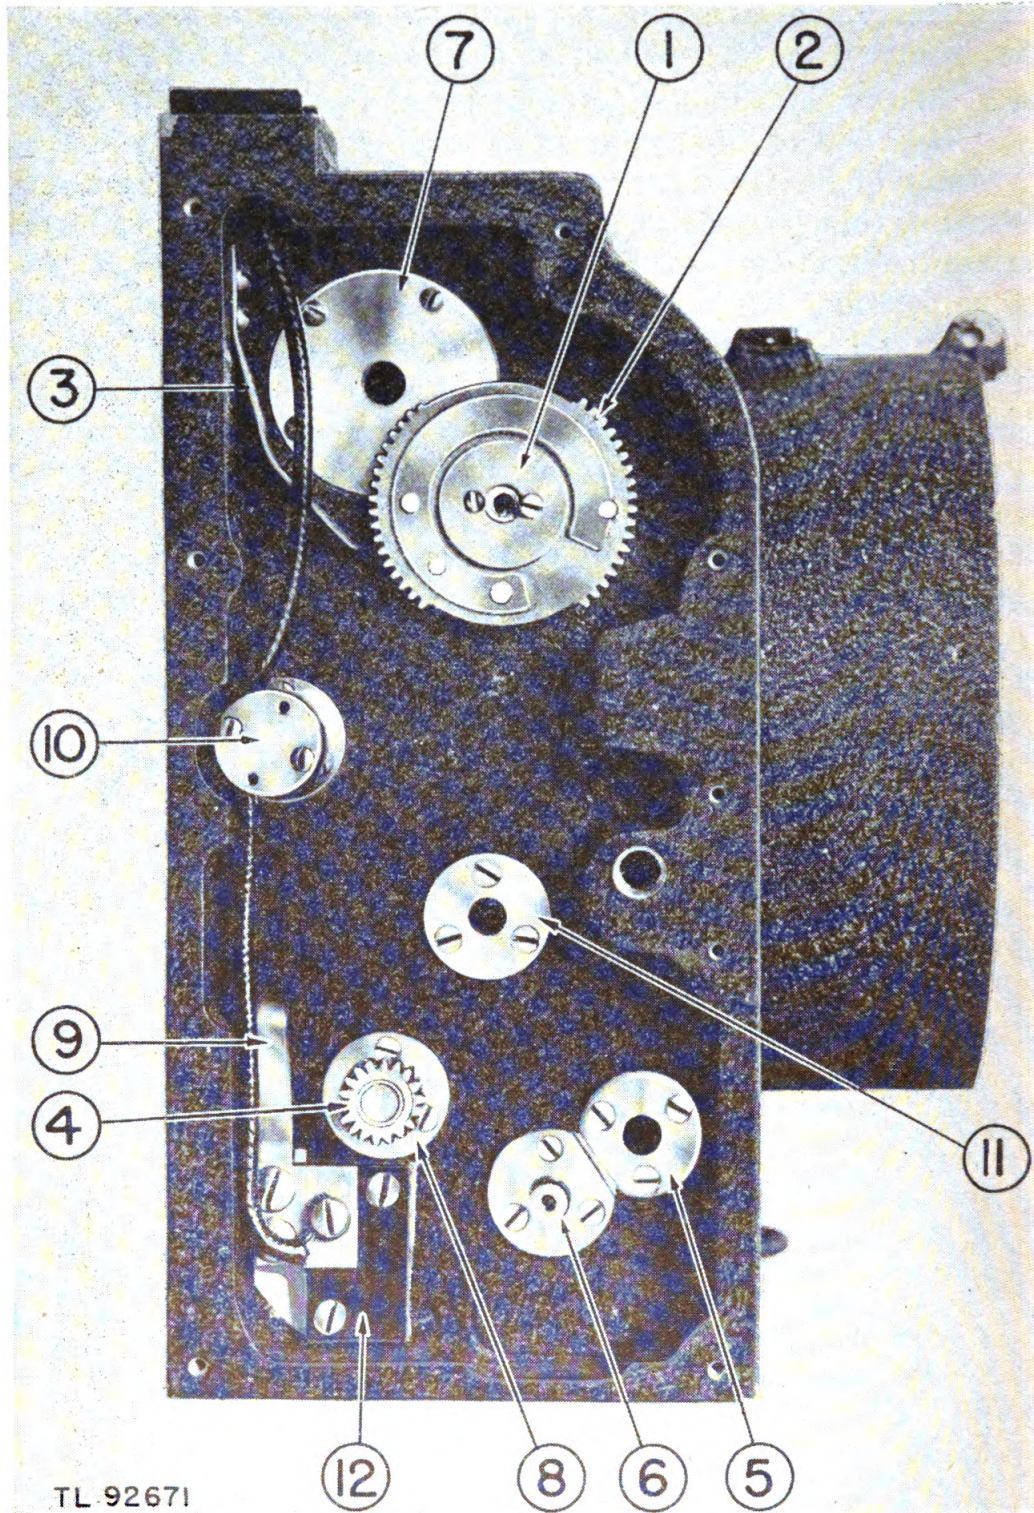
Camera PH-501/PF, right-side view showing bearings and mutilated gear.
